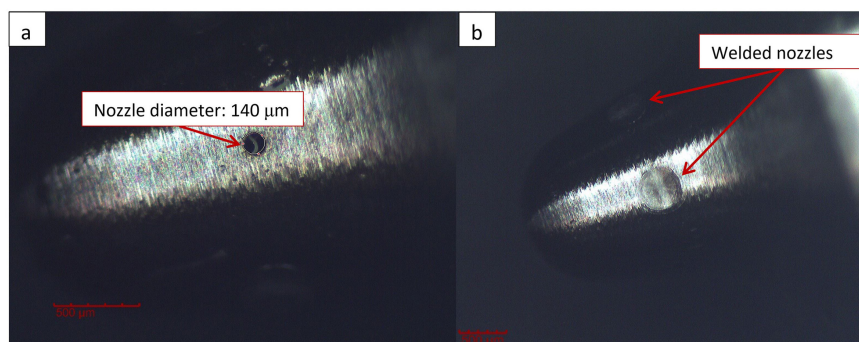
Biodiesel injector: a) open nozzle b) welded nozzle.
